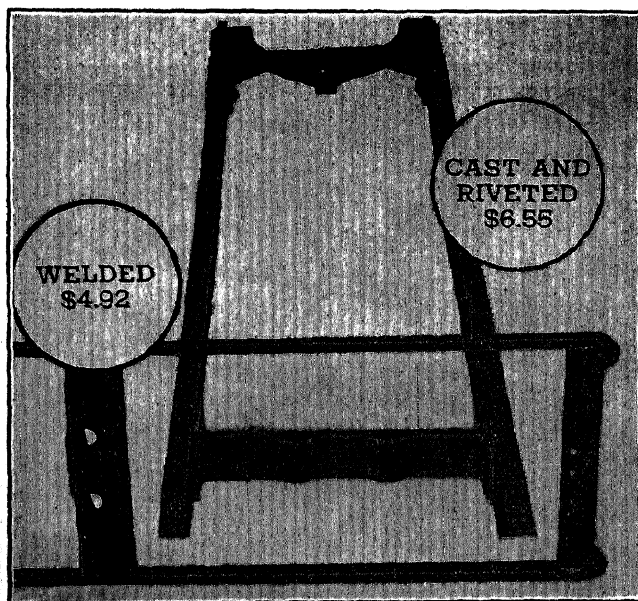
The upper frame of a portable lift truck. Changeover from the cast iron, riveted assembly to welded steel construction, saved \$1.63 and cut its weight 50%.
